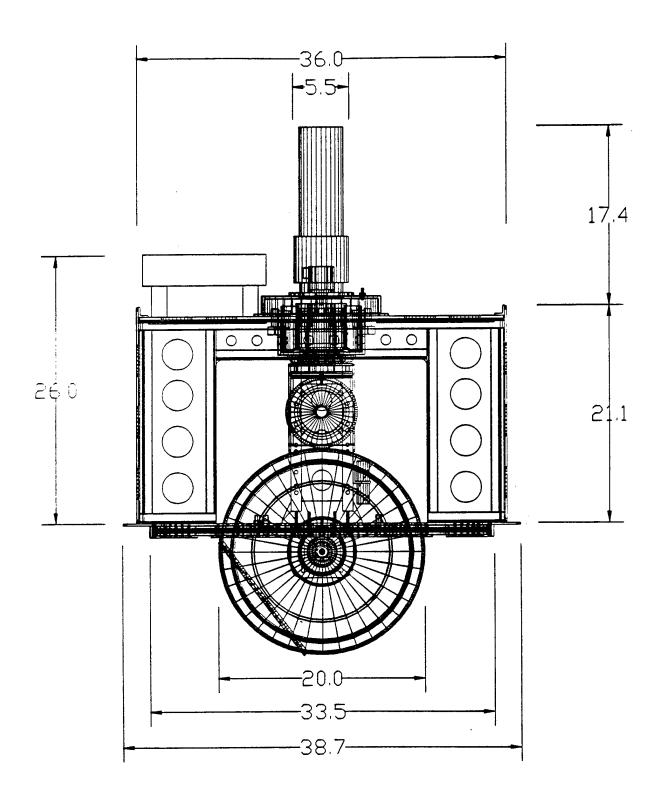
PSR AutocadTM rendering showing critical dimensions (in inches) - side view.
